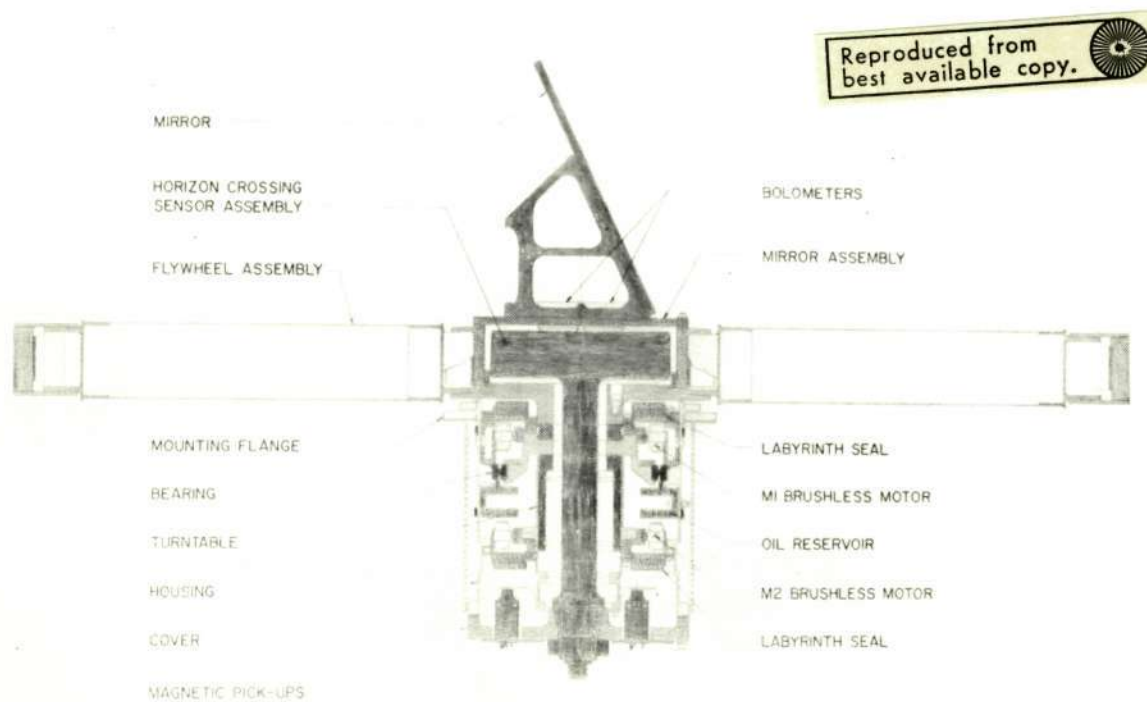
Momentum Wheel Assembly (MWA), Cross Sectional View
